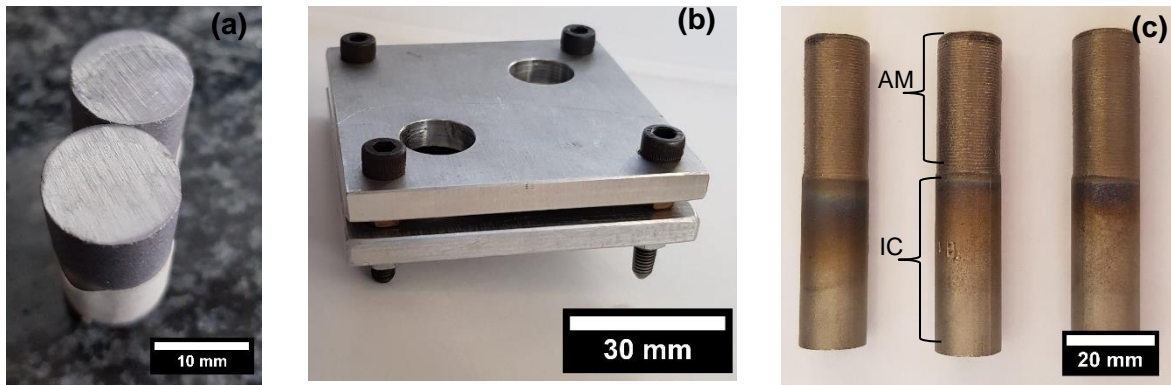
(a) Quarter investment cast rods. (b) Aluminium frame for holding IC parts (c) hybrid manufactured rod Ti6Al4V
